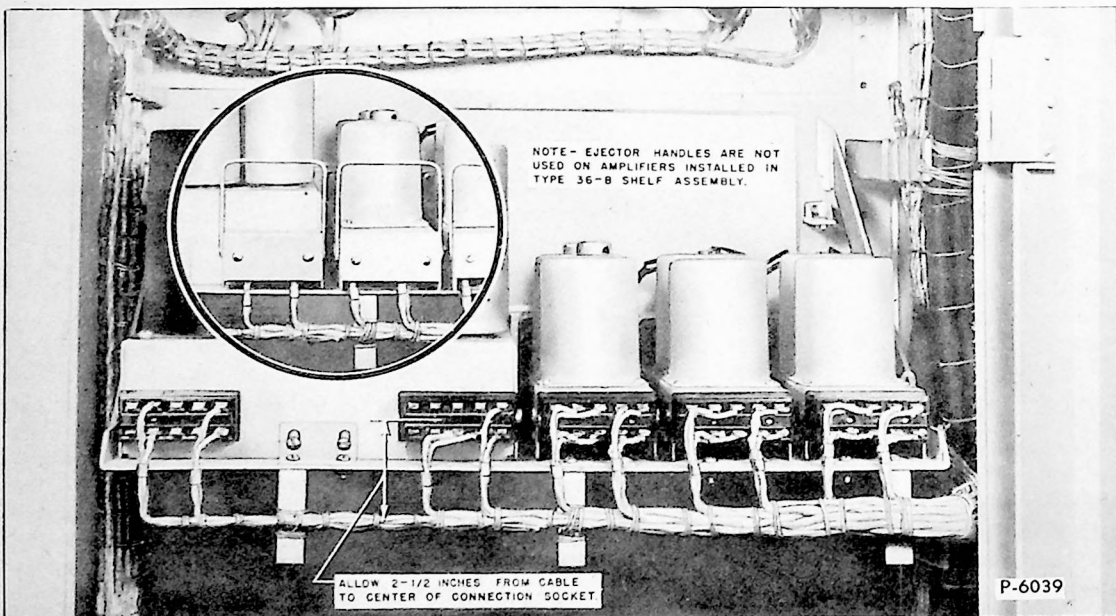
Mounting and wiring in Type 36-B Panel and Shelf assembly (covers removed).
